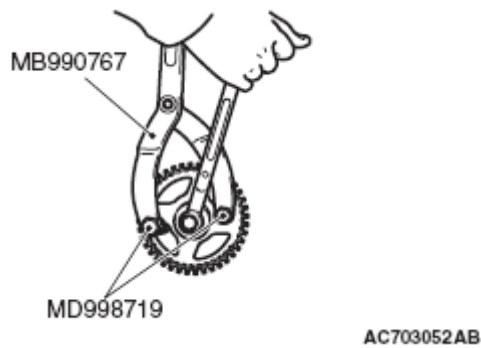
Removing Camshaft Sprocket Using Special Tools MB990767 And MD998719
